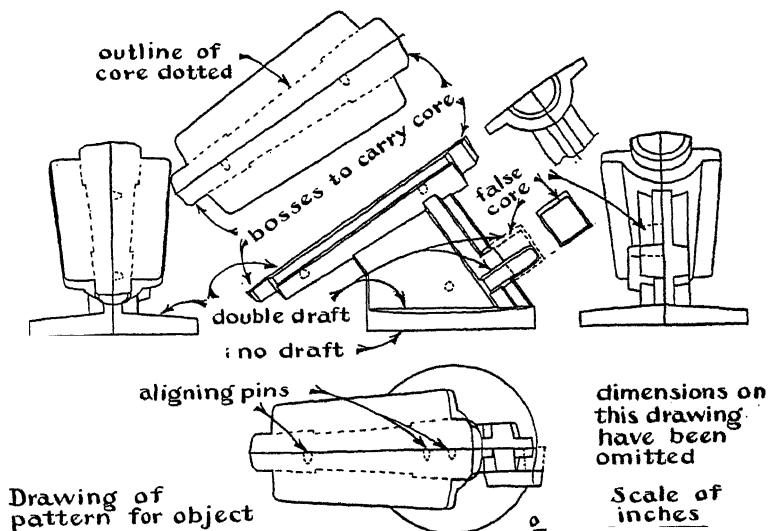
Sand casting. Mechanical drawing for the polar-axis mounting for a small telescope.
